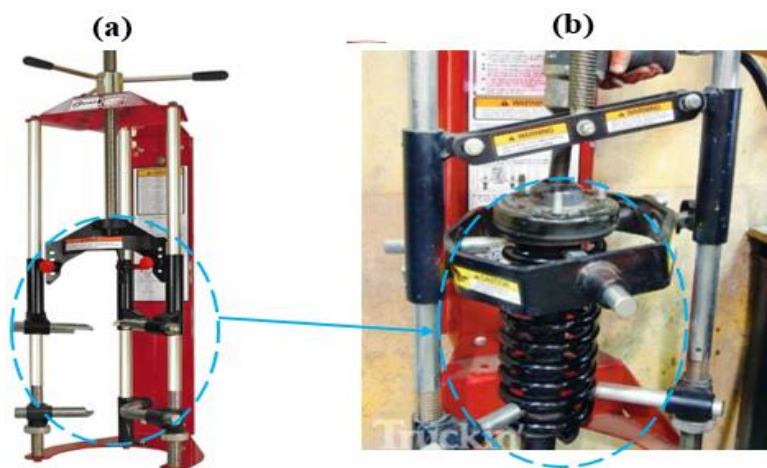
(a) Branick 7600 professional compressor. (b) Compressor in operation
